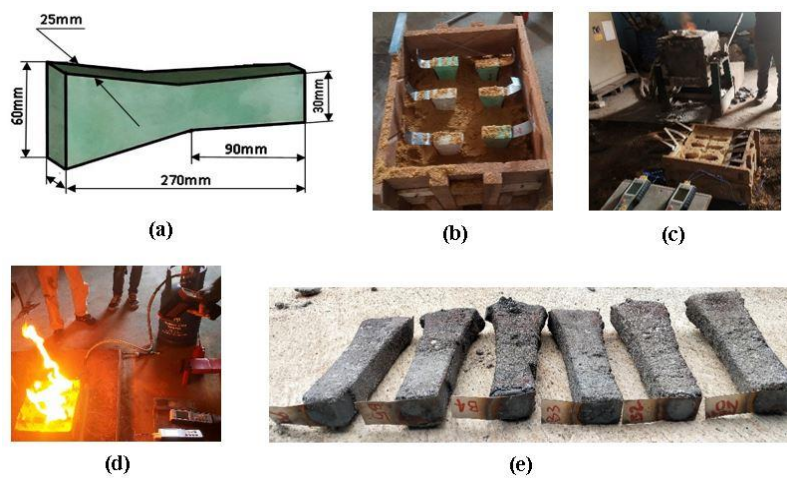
Sample and casting process. (a) Y-Shape pattern and dimensions (b) Y-Shape pattern is installed into the silica sand mold (c) the position of the sand mold and digital thermocouple that is ready for casting (d) preheating process before pouring (e) casting specimen products.
